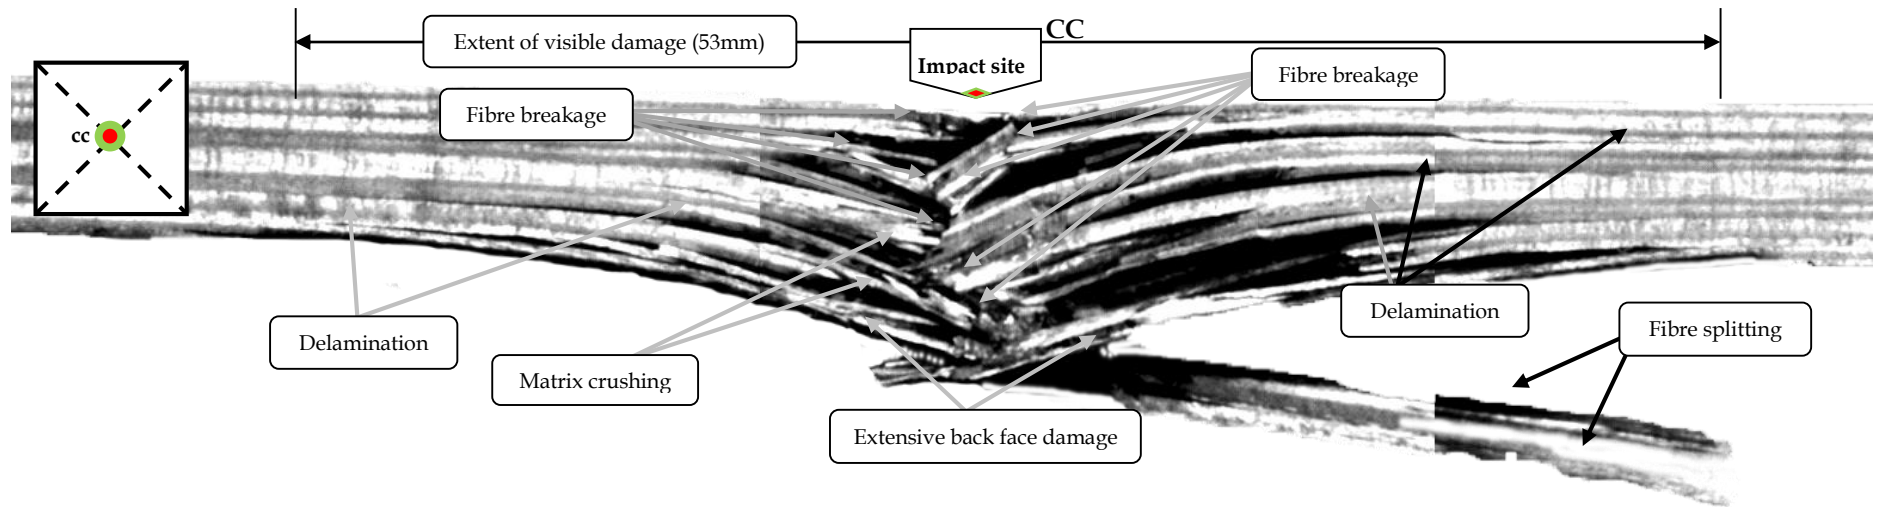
Fractography of positive specimen; Impact and Re-Impact at Centre
